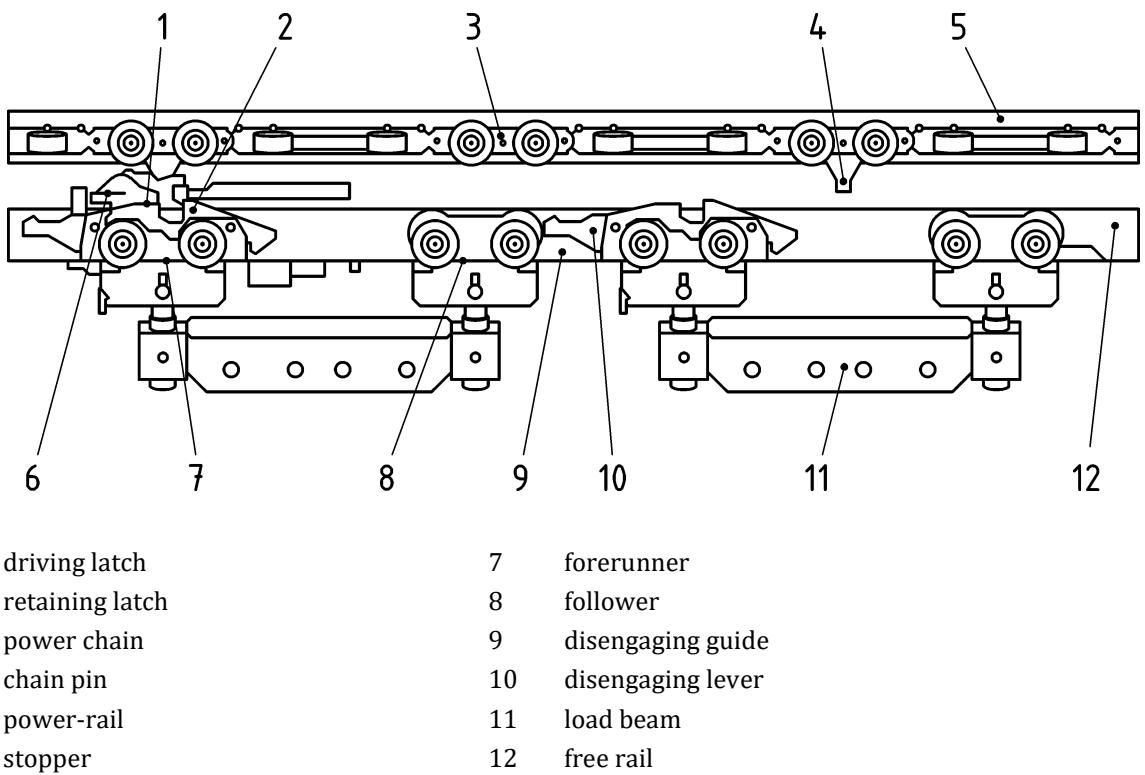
Circular overhead conveyor, power and free-conveyor (side view)
